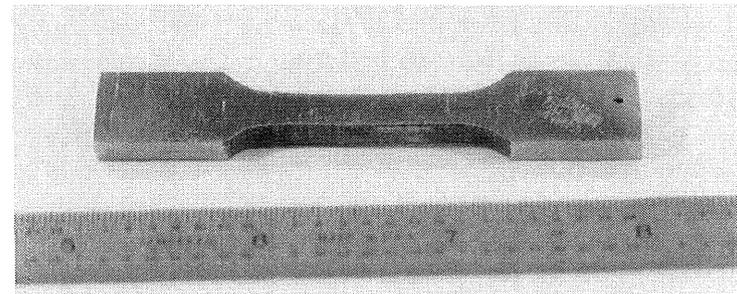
Sintered stainless steel (17-4PH) tensile coupon fabricated by FDMet processing.
